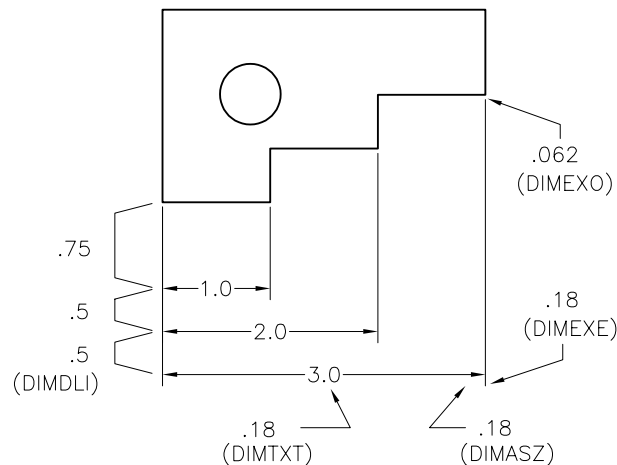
Arrow size, text height, and spacing between dimension lines
